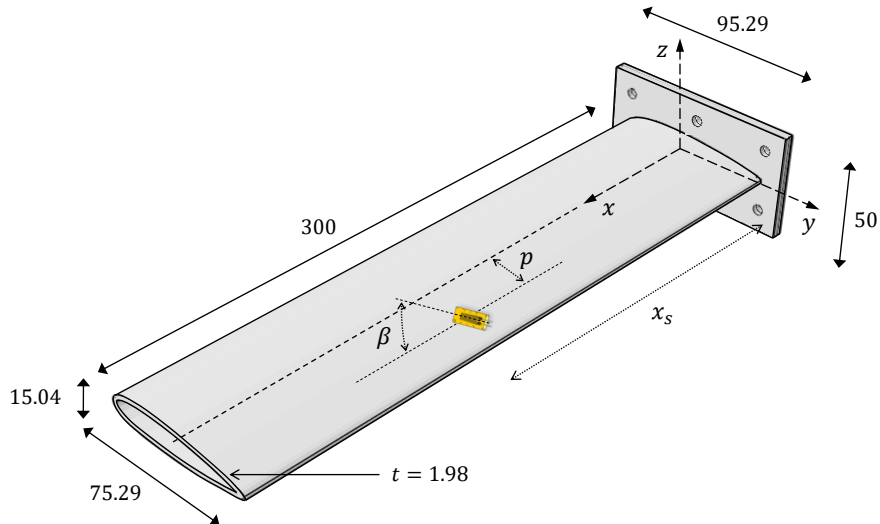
Illustration of the thin-walled airfoil beam ( $t = 1.98$  mm) with the dimensions and the clamping flange shown (all dimensions are in mm)
